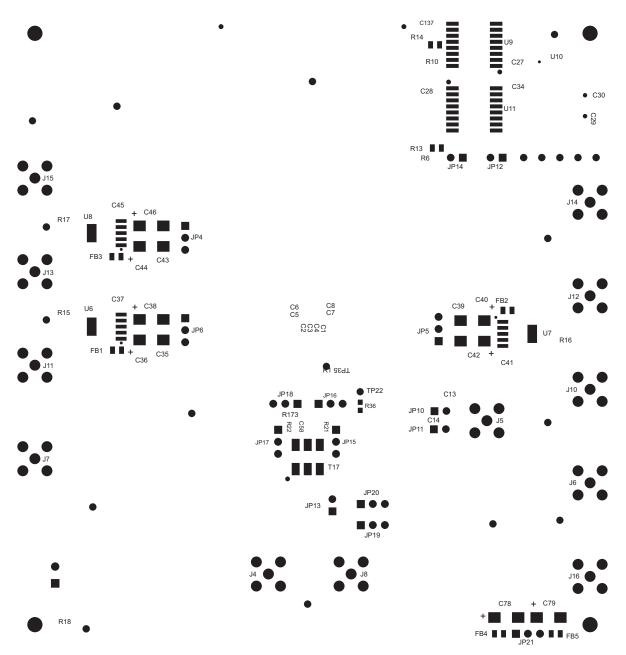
ADS5292EVM Bottom Layer Assembly Drawing – Bottom View
